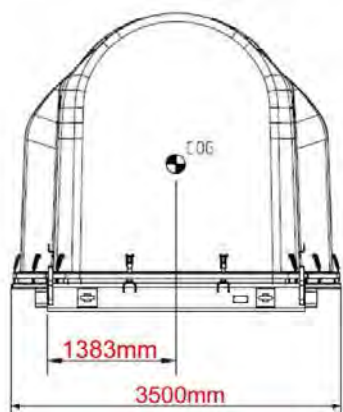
Dimensions of the drive train on a TUFD (end view)
